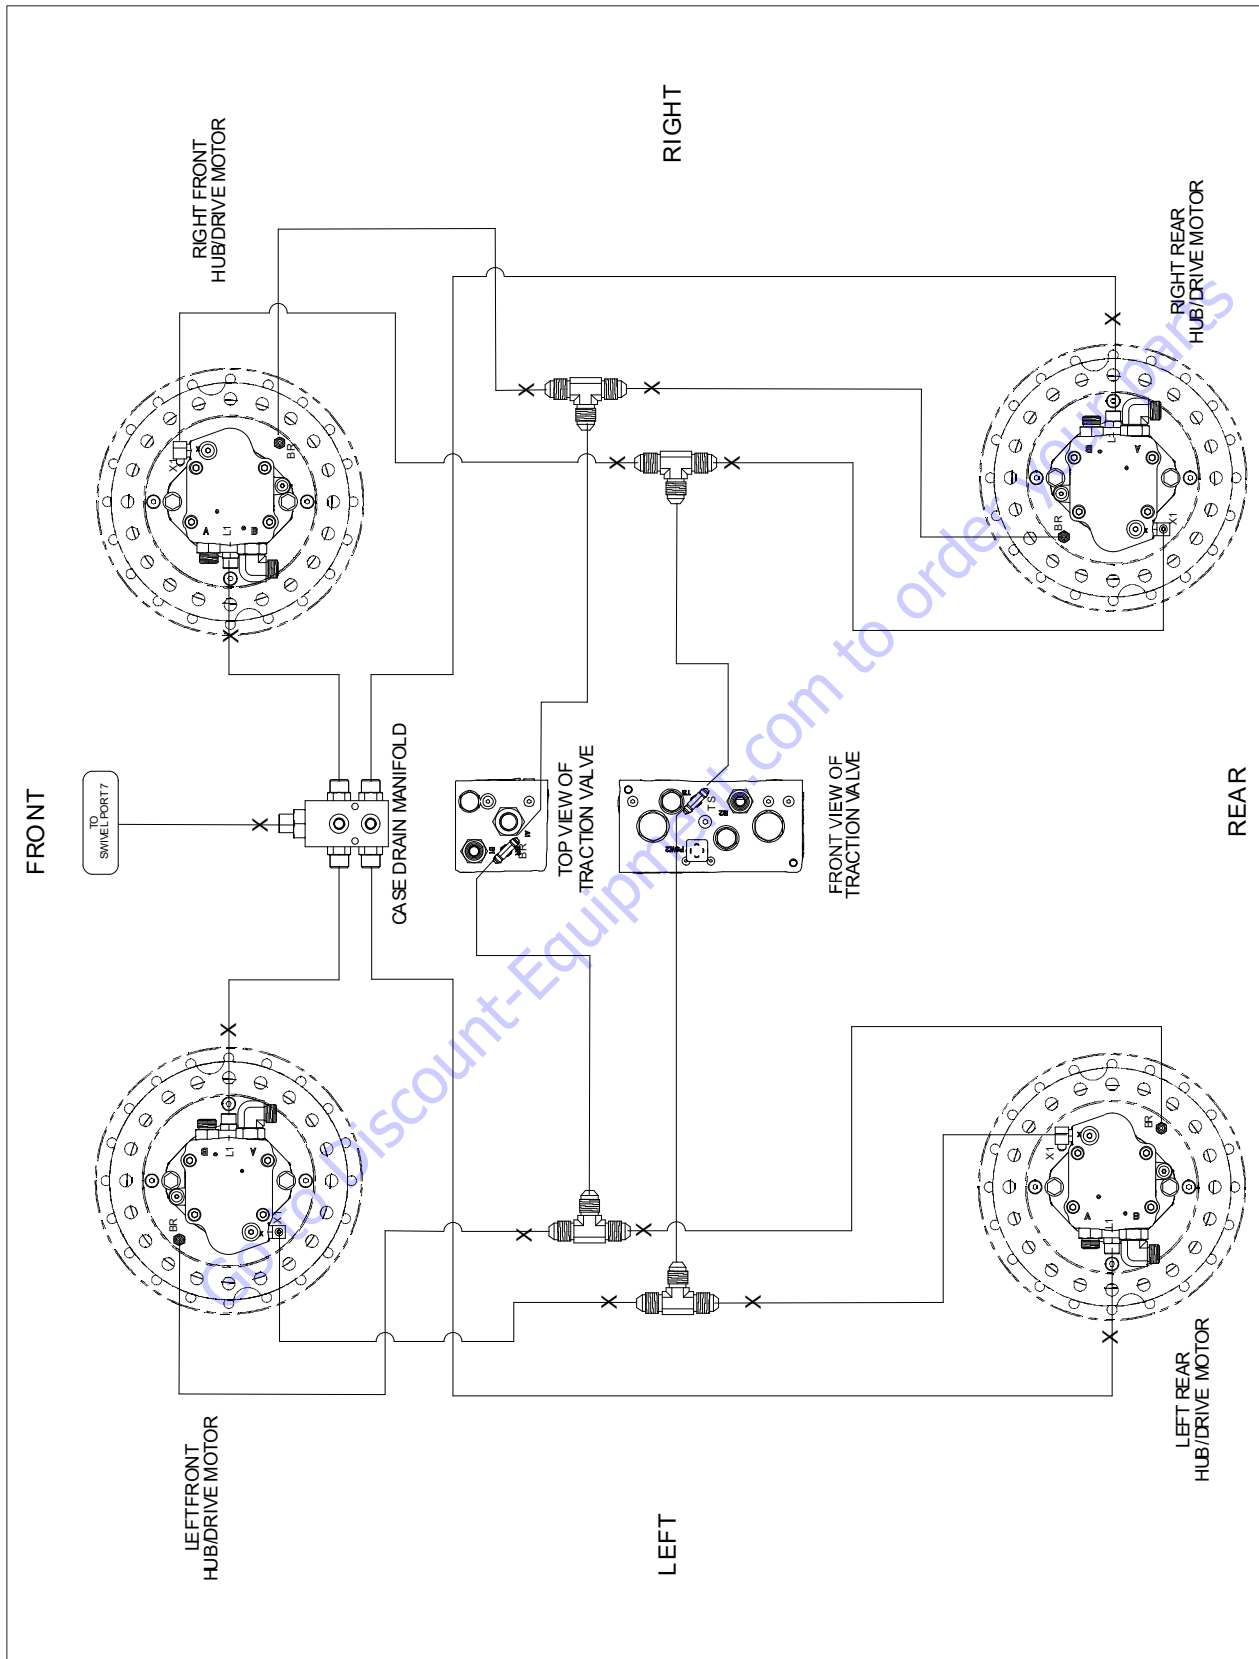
Drive System Hydraulic Circuit - Sheet 2 of 2
